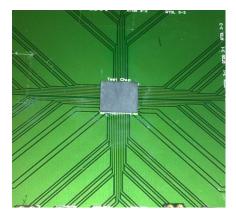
Photograph of the fabricated thermal test chip flip-chip bonded onto a dedicated PCB
